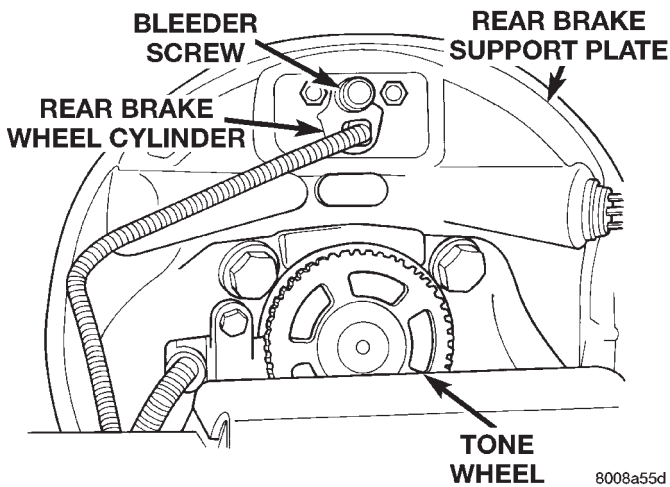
Rear Wheel Cylinder Bleeder Screw
